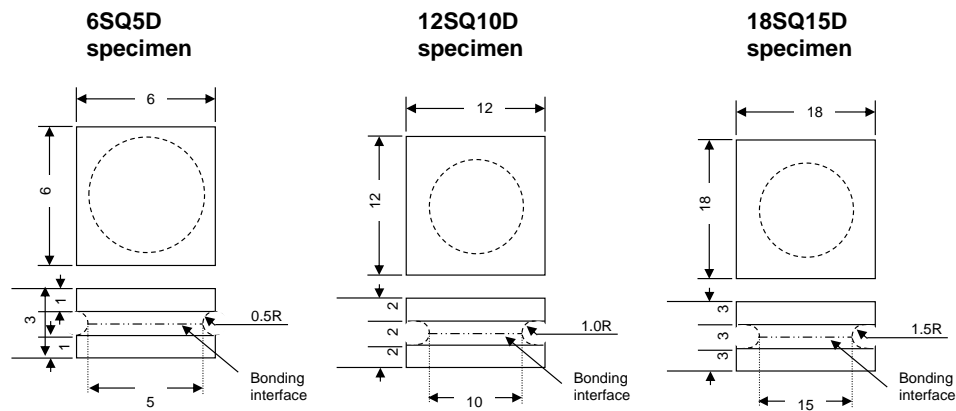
Drawings of three types of torsional shear specimens. Dimensions in mm.
